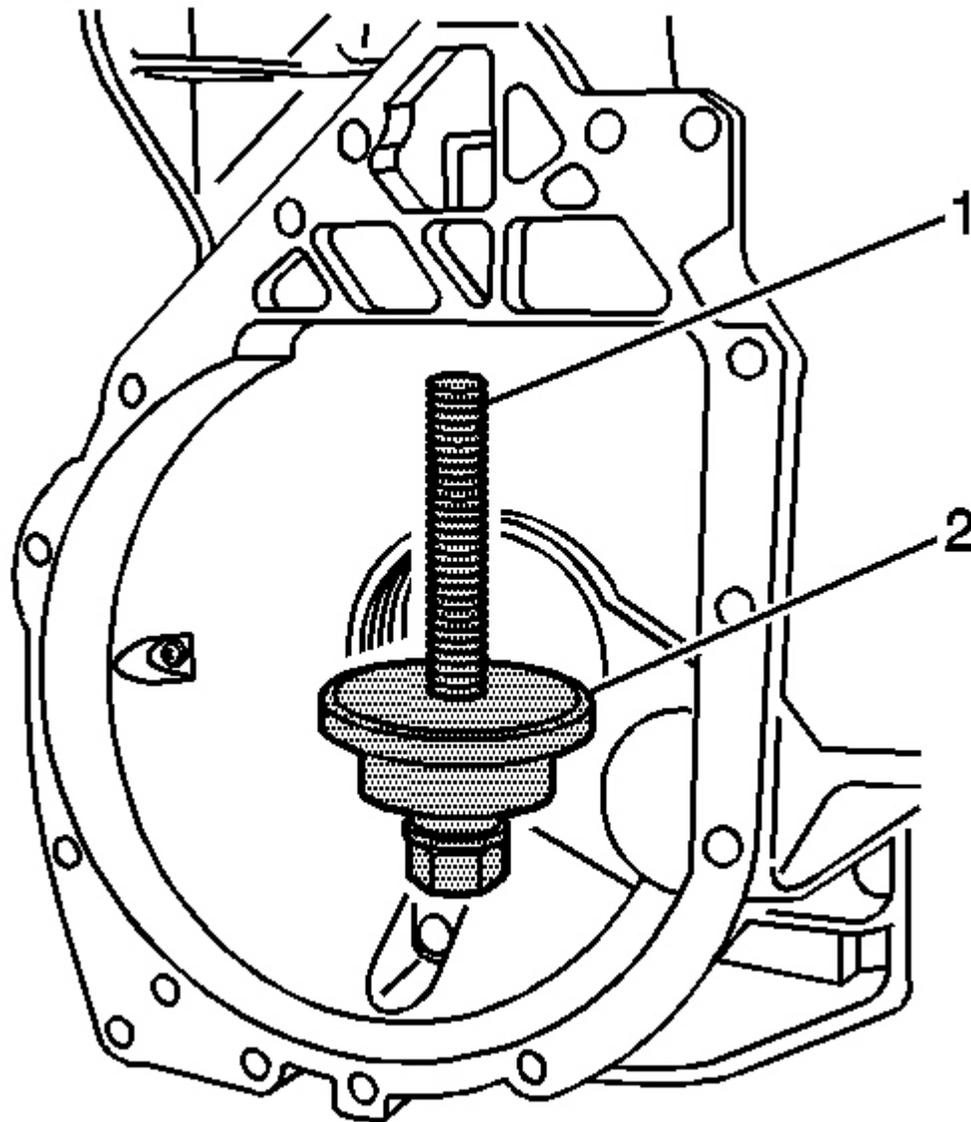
Installing Forcing Screw & J 45754-2 Into Inner Pinion Bearing Cup Bore
